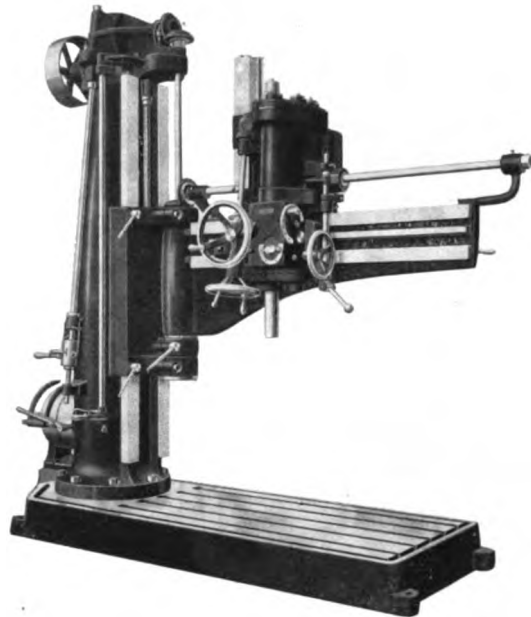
6-Ft. Heavy Type Plain Radial Drill
